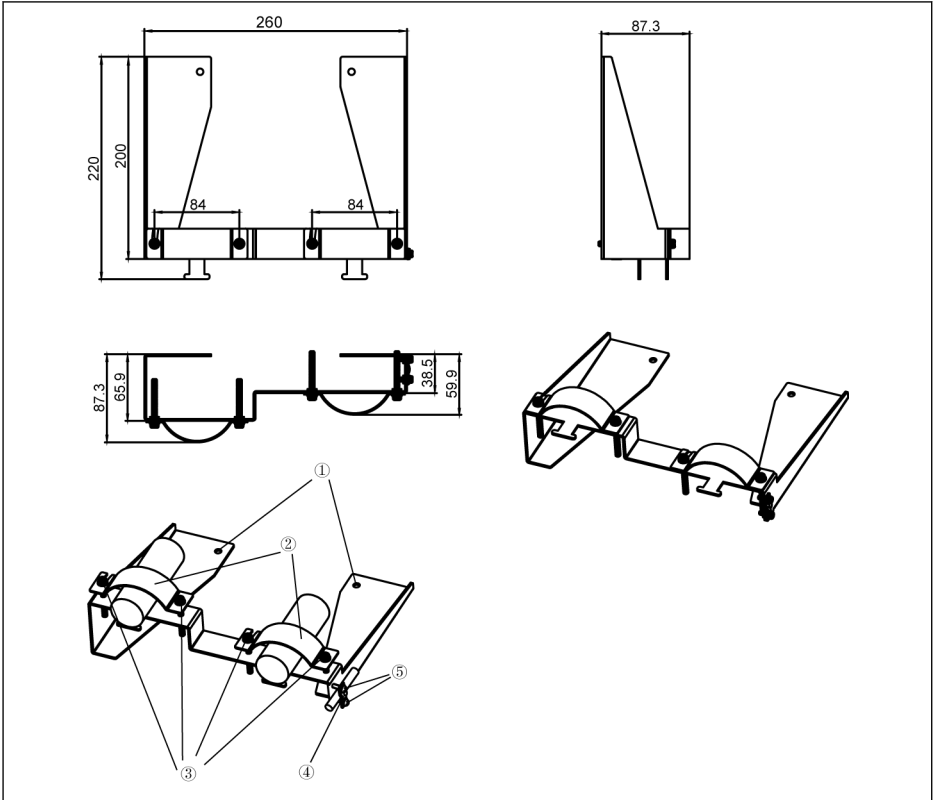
Shielded cable connection with accessories for I, J housing (FEAM03.2-004-NN-NNNN)
